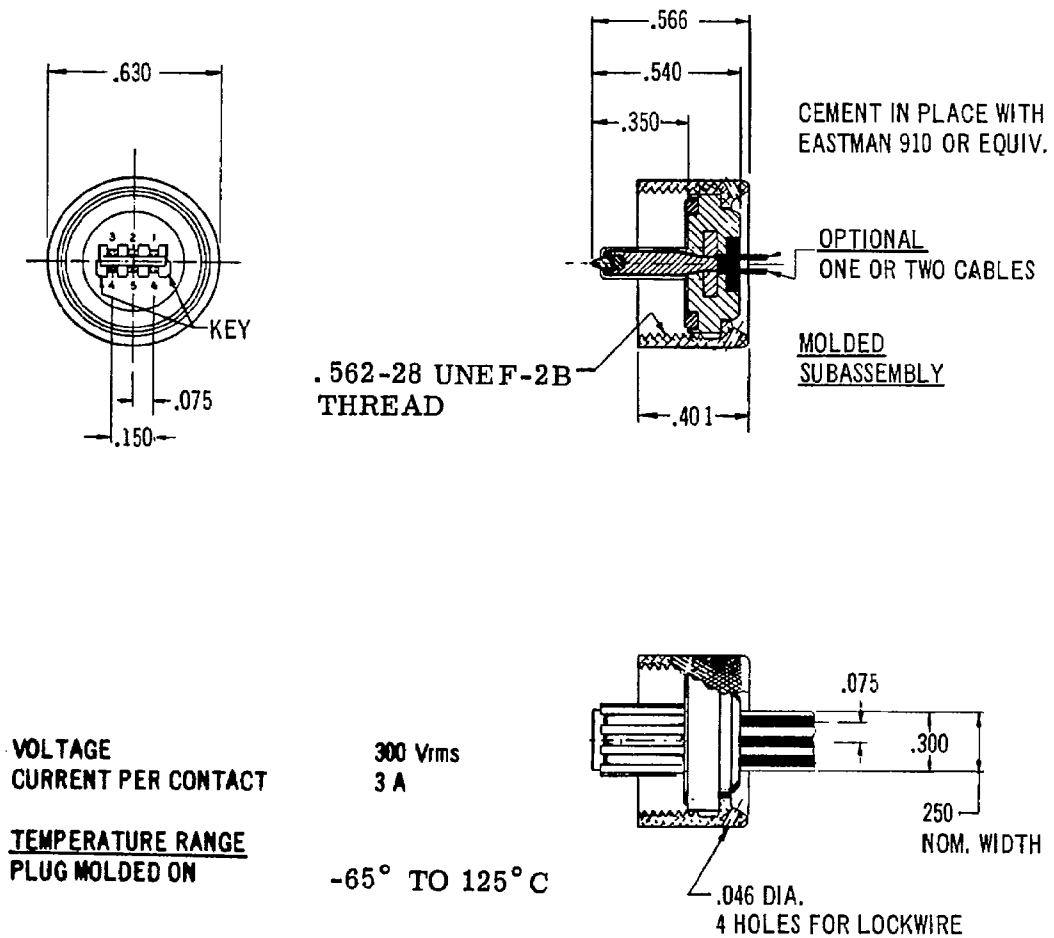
MIL-C-55544/9 Molded-on cylindrical plug assembly, .25-inch wide cable.
